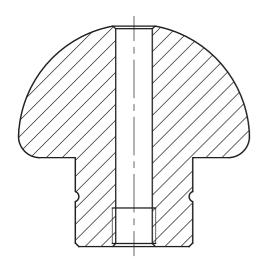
New Handle design free of cavities; easier to clean (The Driving rod has the "bolt" part of the connection)(mm)
